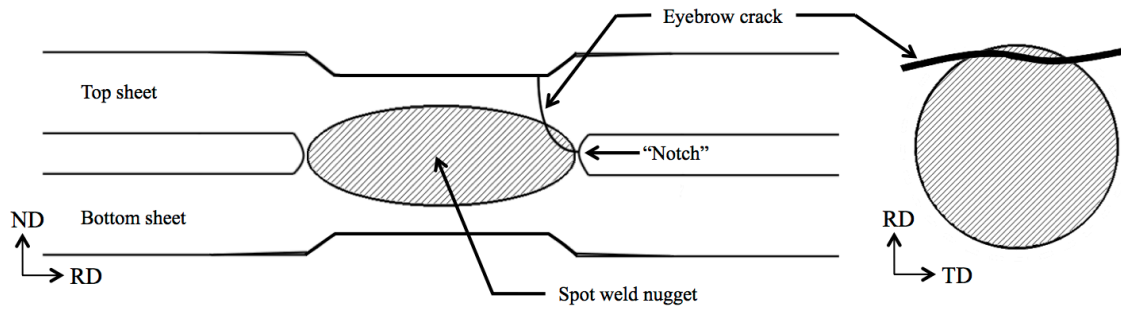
Schematic of lap-shear specimen noting the faying surface, notch from nugget indentation and the crack path of an eyebrow crack.
